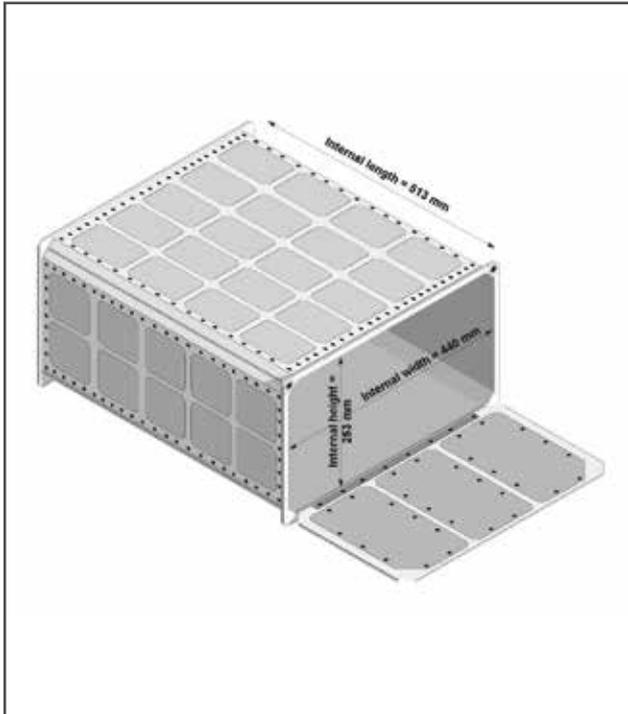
Middeck Locker (MDL) dimensions and layout
